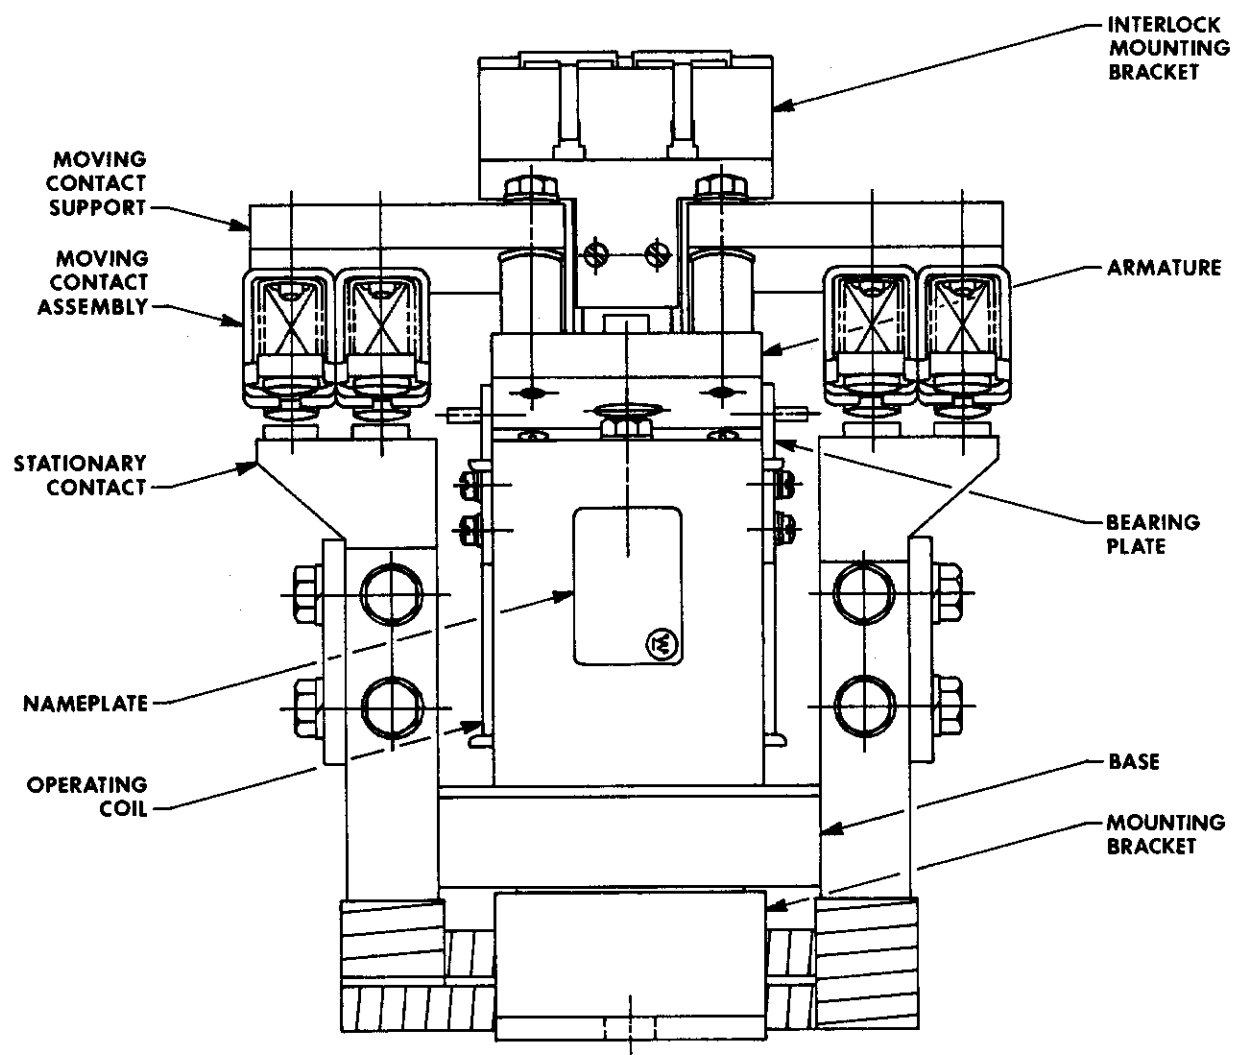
Type DPR Contactor (Side View) (Not Shown In Operating Position)
